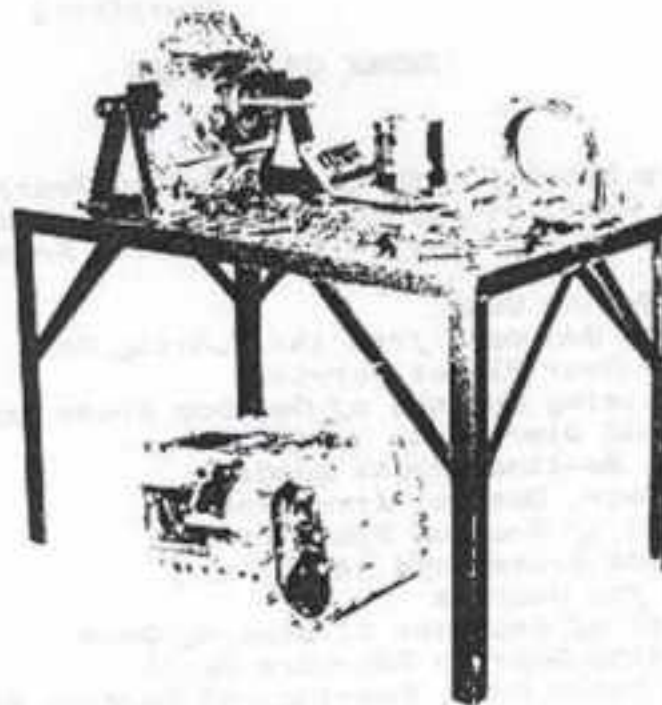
GEARBOX - SUITABLE ASSEMBLY BENCH MADE FROM ANGLE AND SHEET IRON (LOCAL MANUFACTURE)
